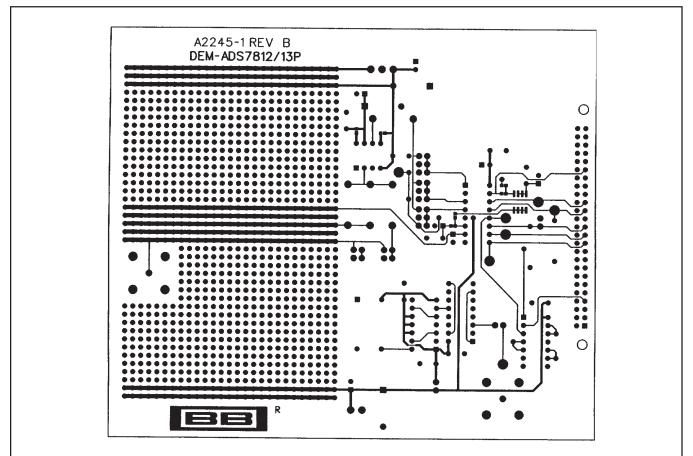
Component Side of the DEM-ADS7812/13P Demonstration Board.
